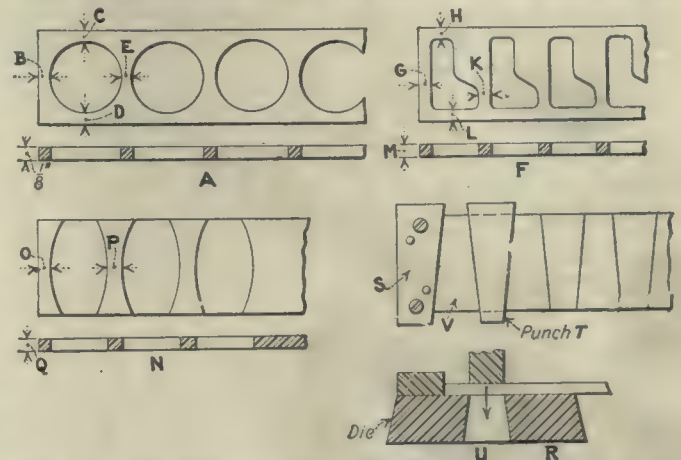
POSITION OF PUNCH IN BLANKING OPERATIONS
